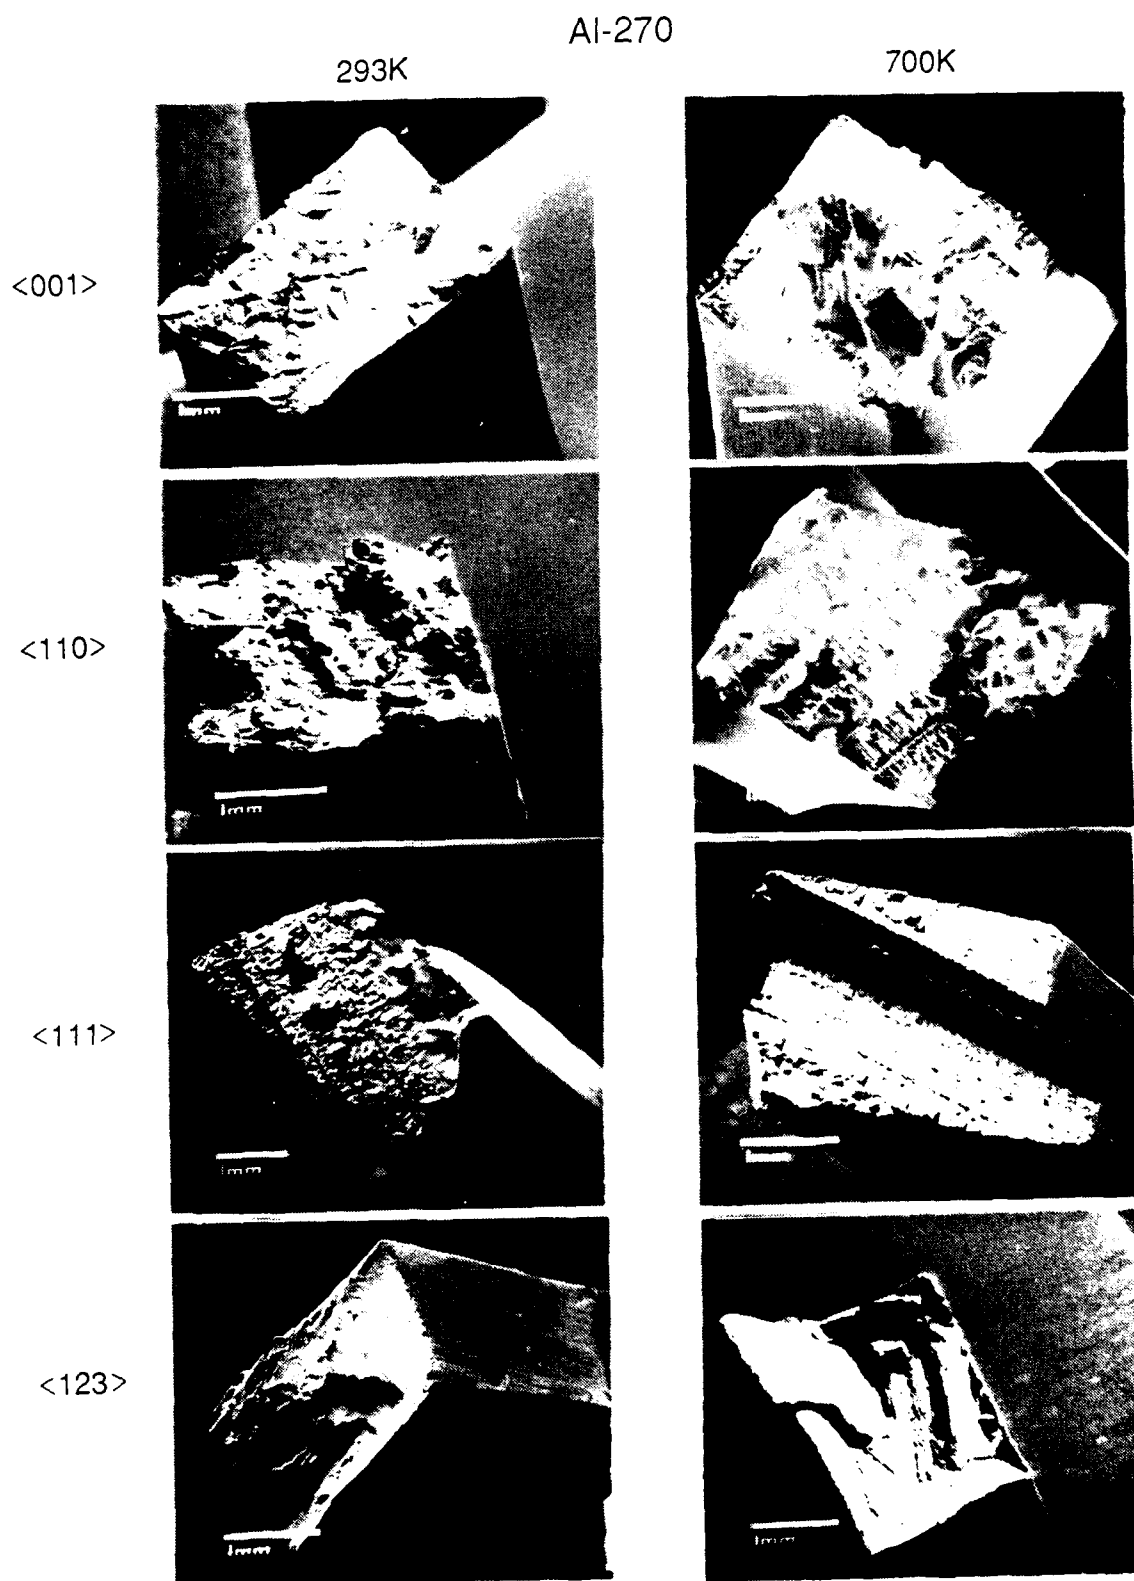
Appearance of Fracture Surfaces in the Binary Alloy Al-270 Resulting from Tensile Testing at 293K (left photos) and 700K (right photos). The tensile stress axes are from top to bottom <001>, <110>, <111>, and <123>.
